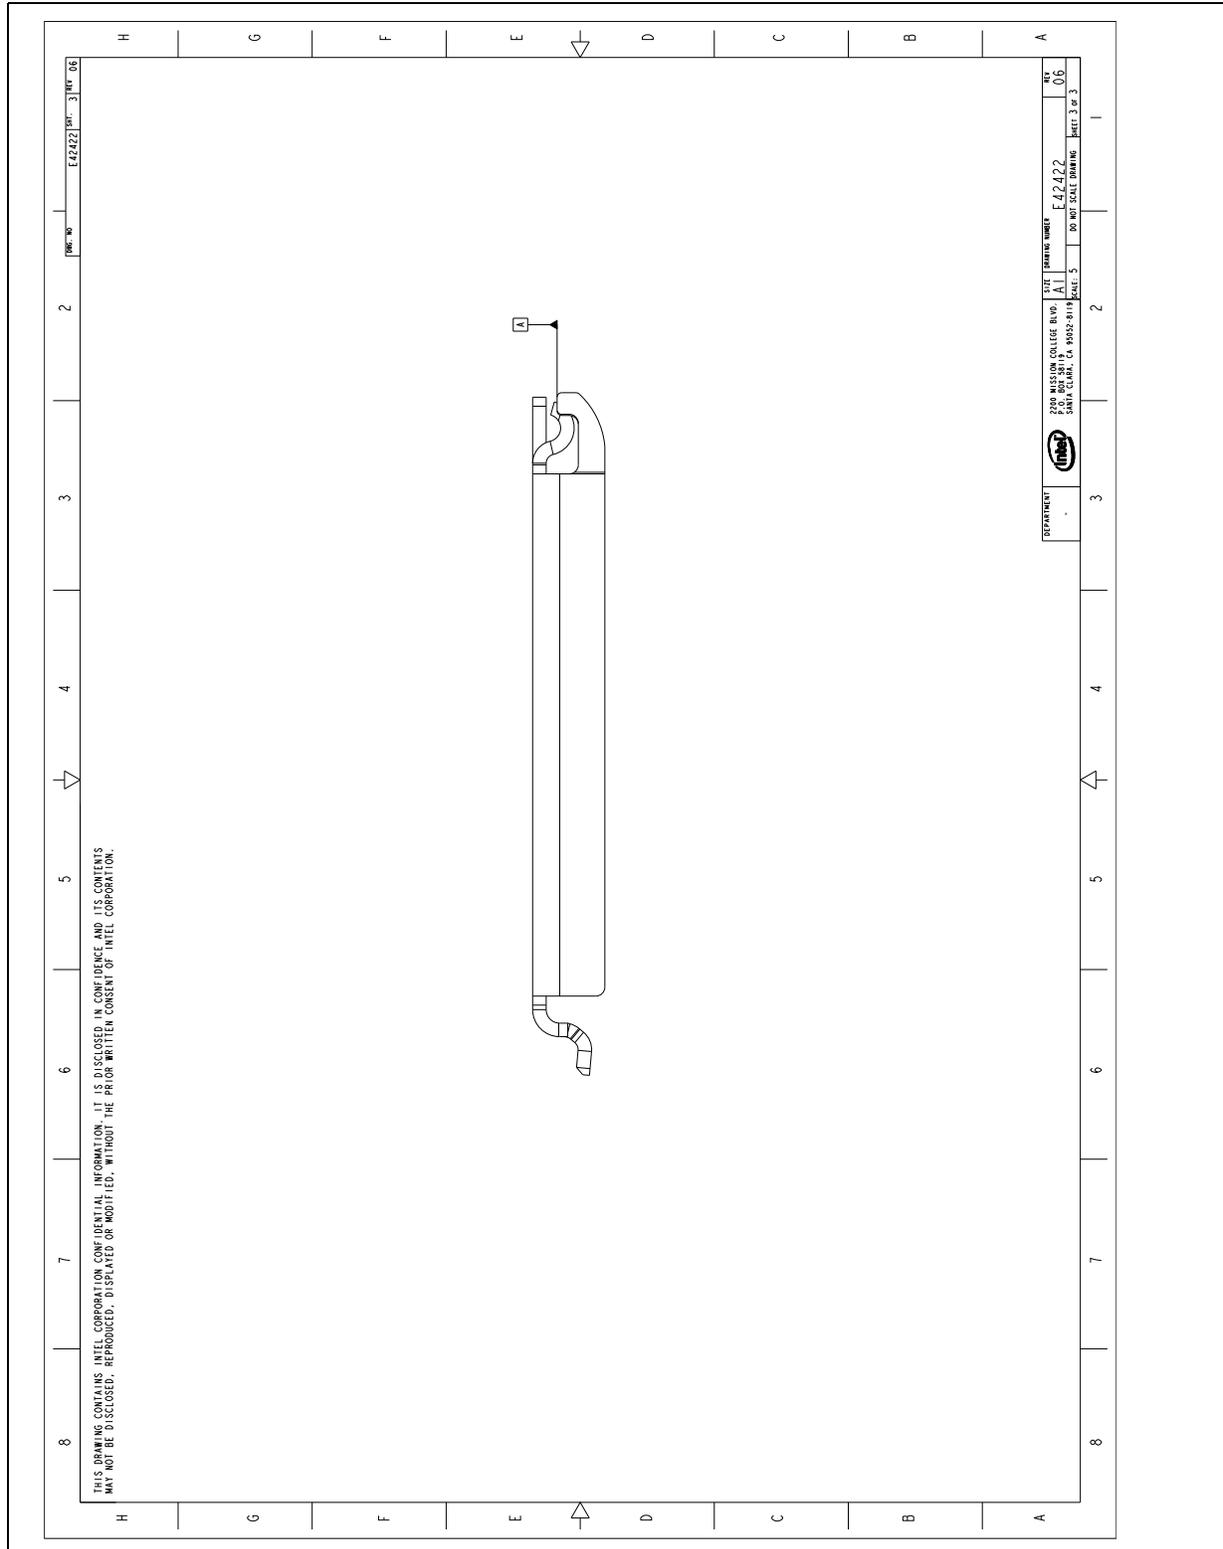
High-Load Independent Loading Assembly (HL-ILM) Mechanical Drawing – Sheet 5 of 7
